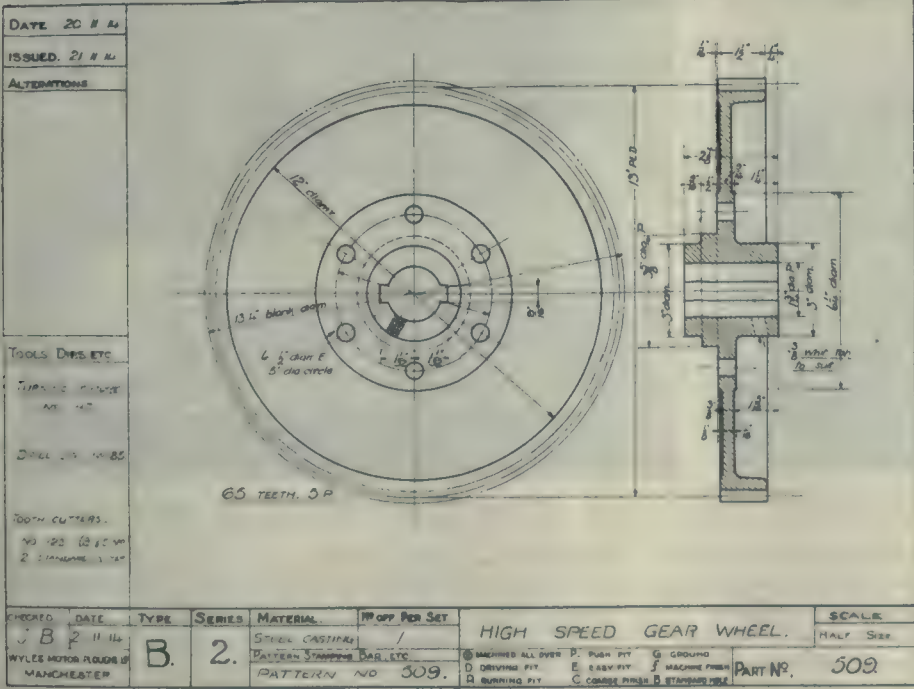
JIG, TOOL AND GAUGE RECORD.
